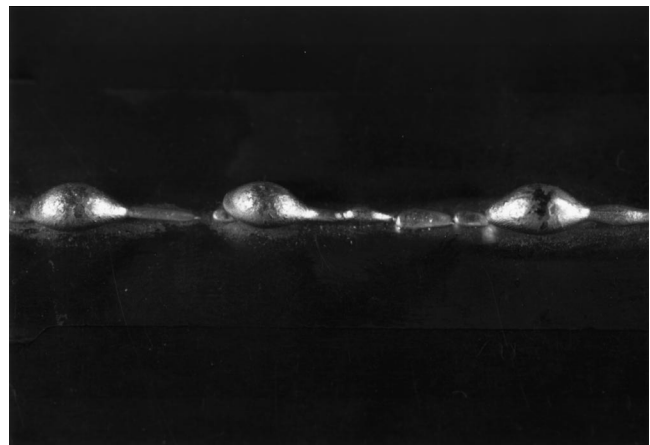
Photograph of the underbead of the testpiece welded at  $+70$  mA defocus, which showed considerable underbead and undercut.
